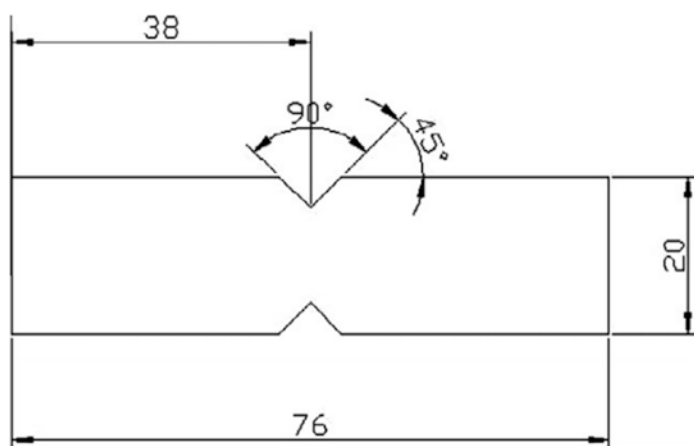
Double shear test specimen (ASTM: D5379)
